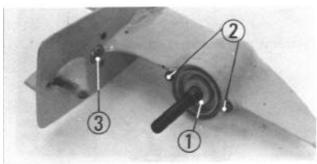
① Propeller shaft holder ② Anode metal ② 6 mm bolts
